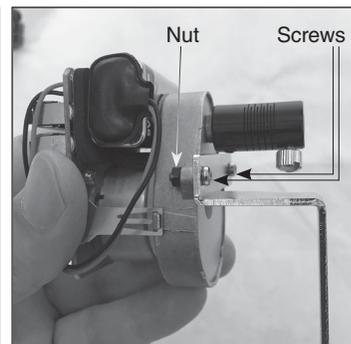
Remove the pre-installed bracket by unscrewing the two attachment screws.
